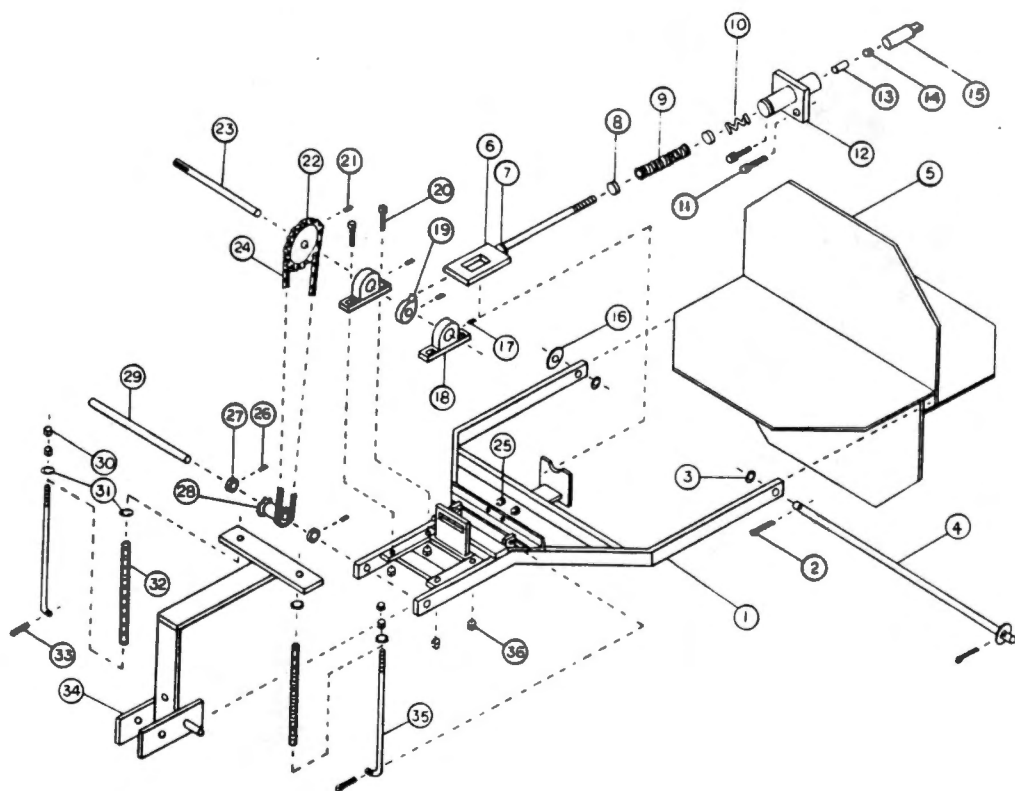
Exploded view of experimental tripping-shovel diking unit showing relationship of components. Numbered components are identified on p. 71.
